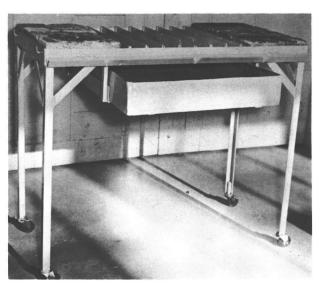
Portable acetylene welding and cutting table. Adaptation of Equipment Plan No. 4. Note slag pan.
